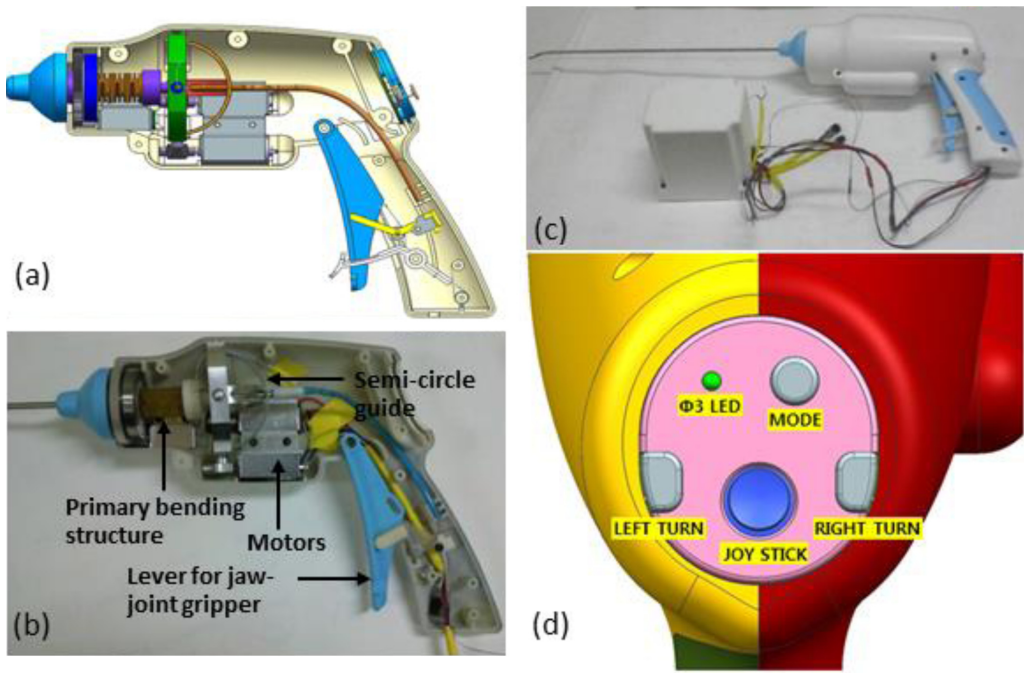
Prototype of MTPS type laparoscopic surgical instrument: (a) 3D CAD interior view, (b) Assembled prototype interior view, (c) Assembled prototype exterior view, (d) 3D CAD control panel with joy stick
